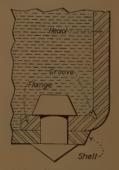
Groove corroded in fillet of head flange.
